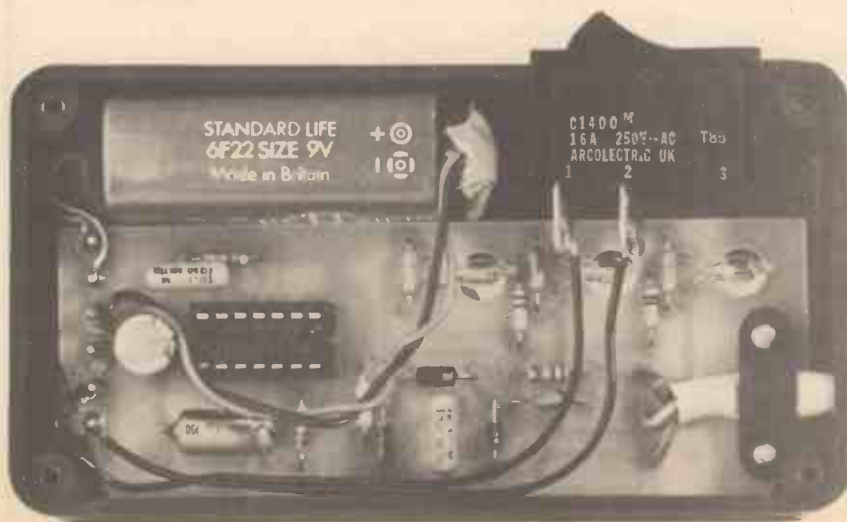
Arrangement for mounting the printed circuit board in the case.
